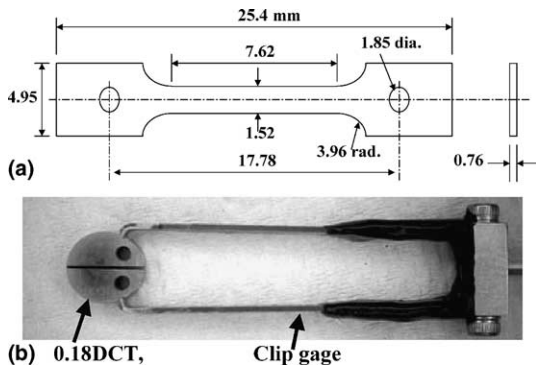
(a) Tensile specimen of SS-3 type, (b) the outboard clip gage seated on the disk compact specimen.
